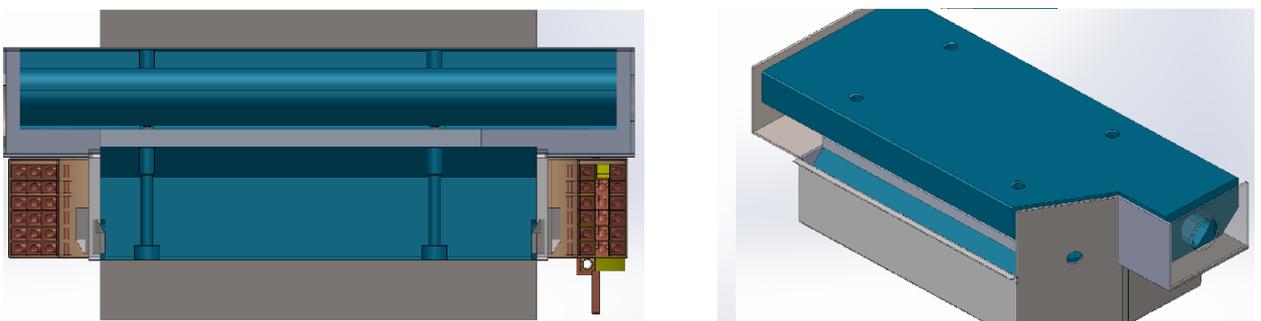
Left - longitudinal cross-section of the magnet; right - pole assembly inside the vacuum chamber. Not a final version. Pictures provided by A. Didenko.
